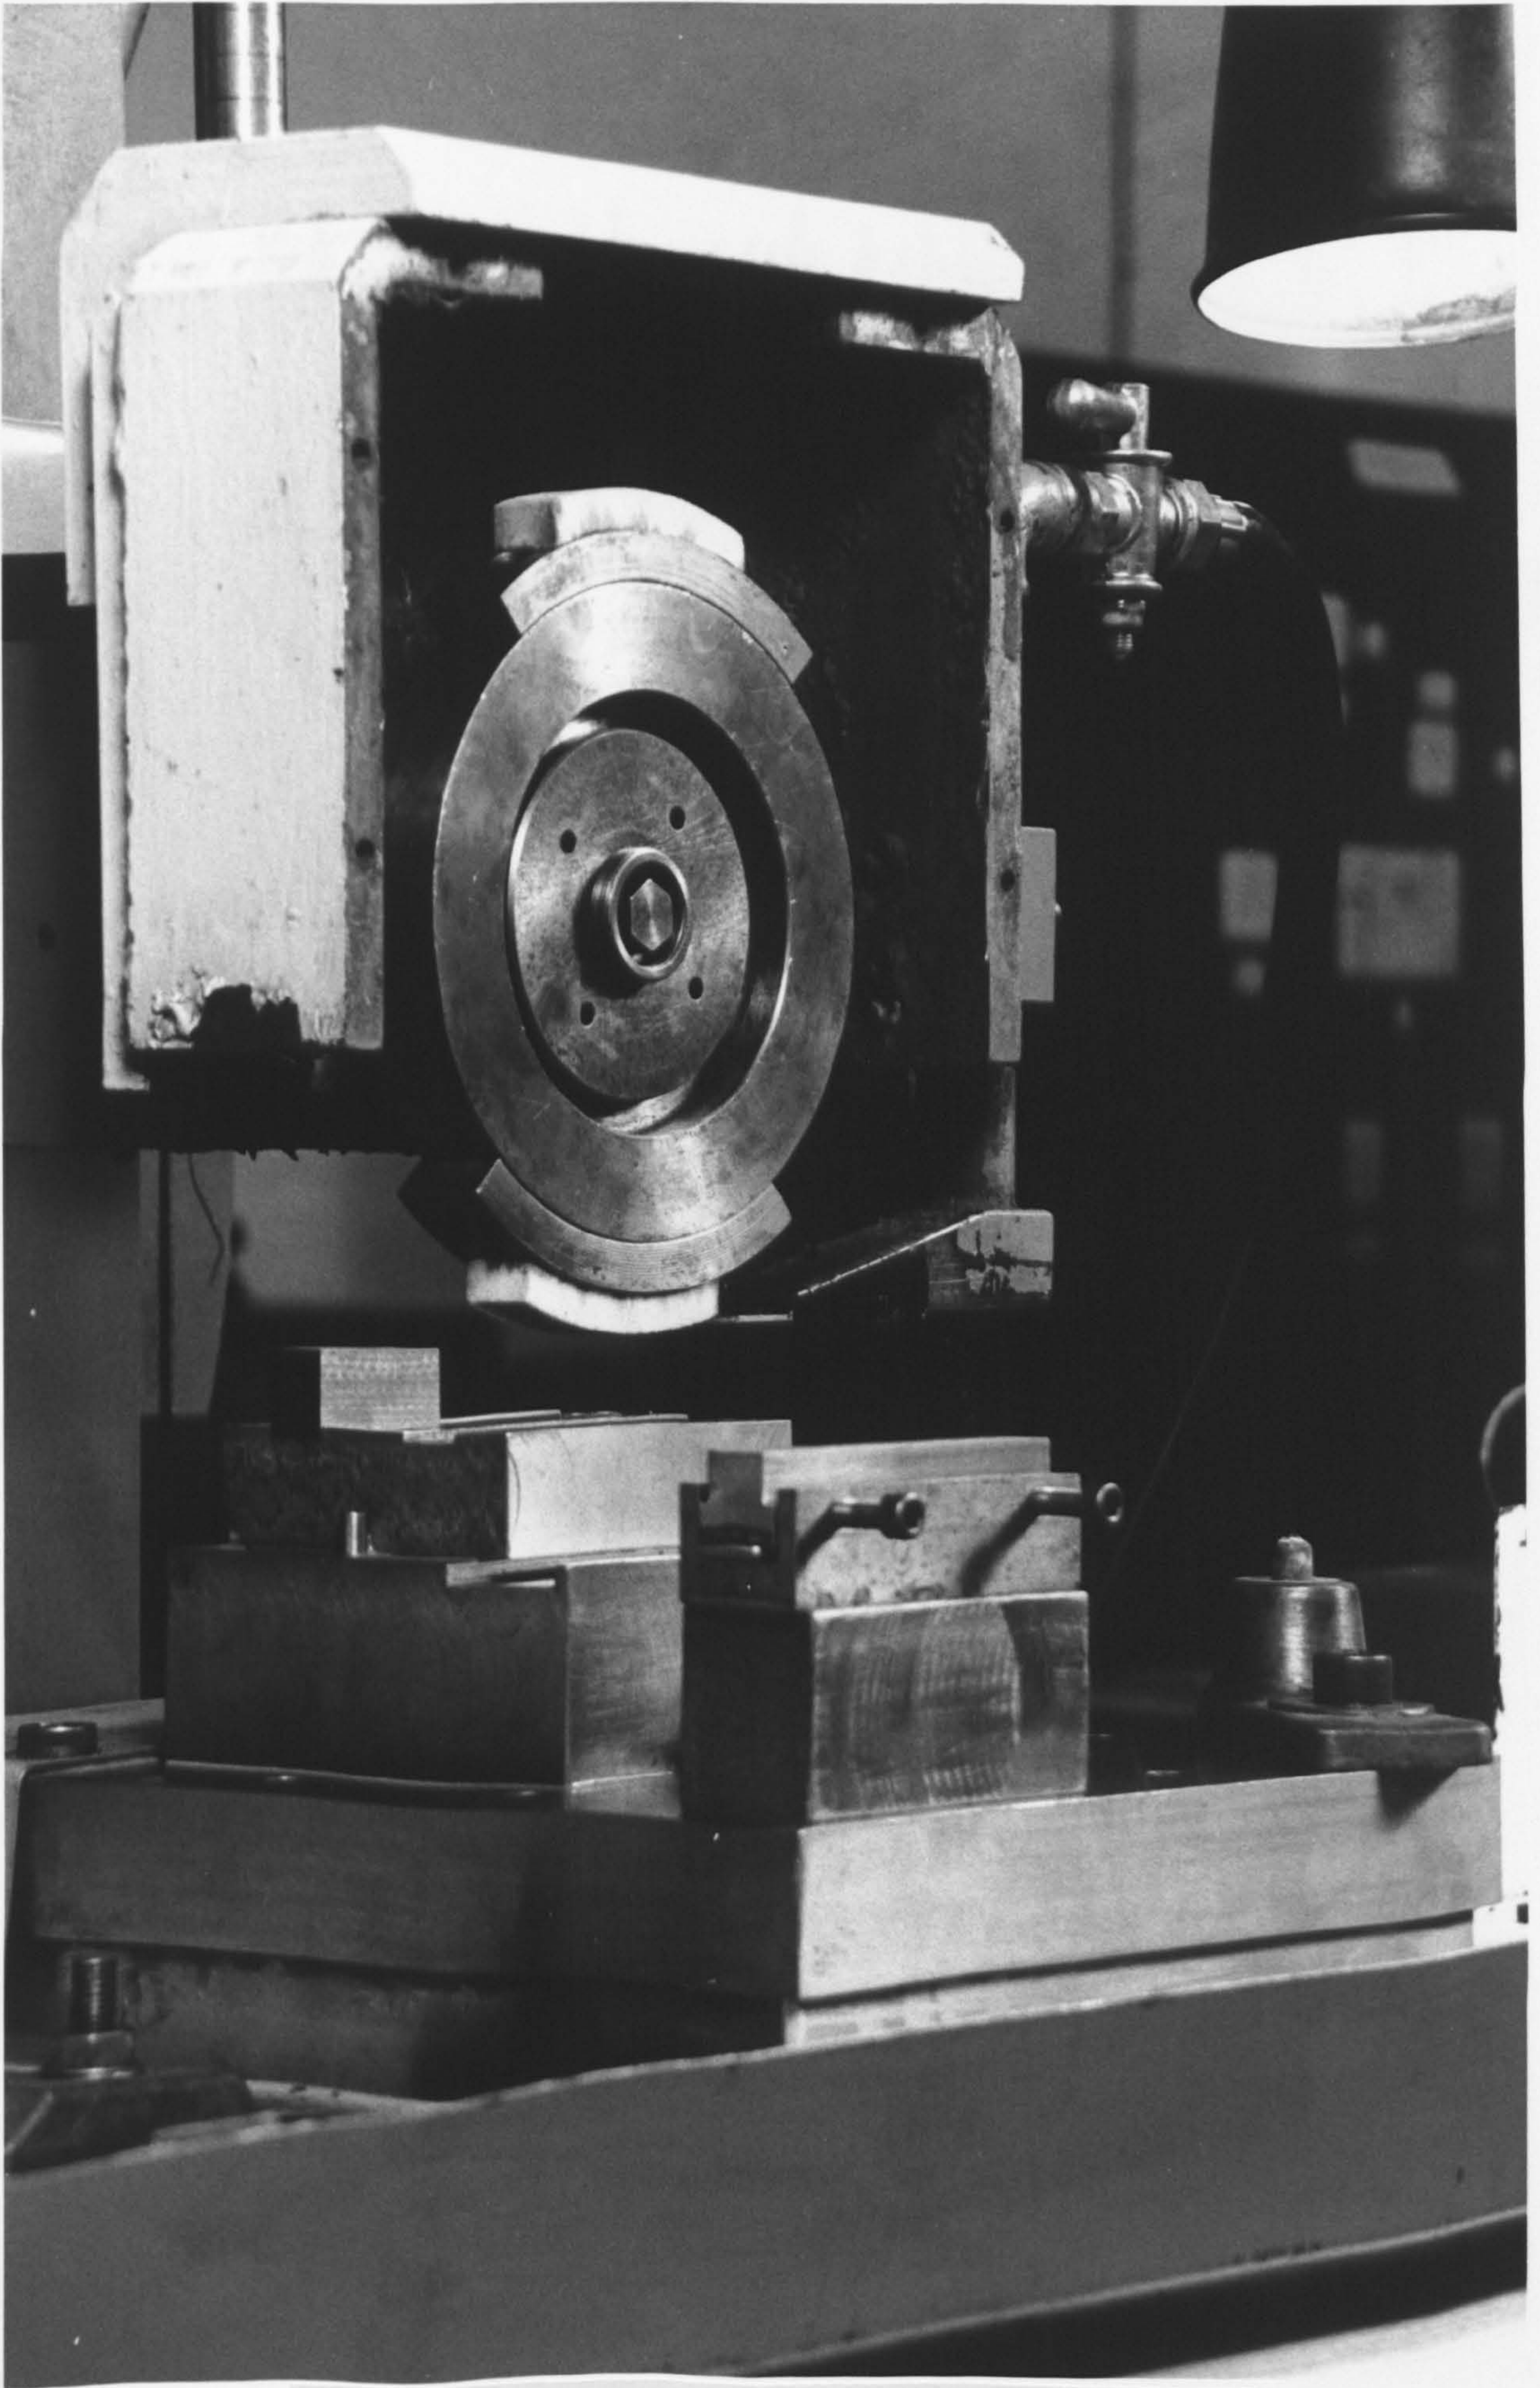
Experimental apparatus showing grinding wheel, dresser and block.
